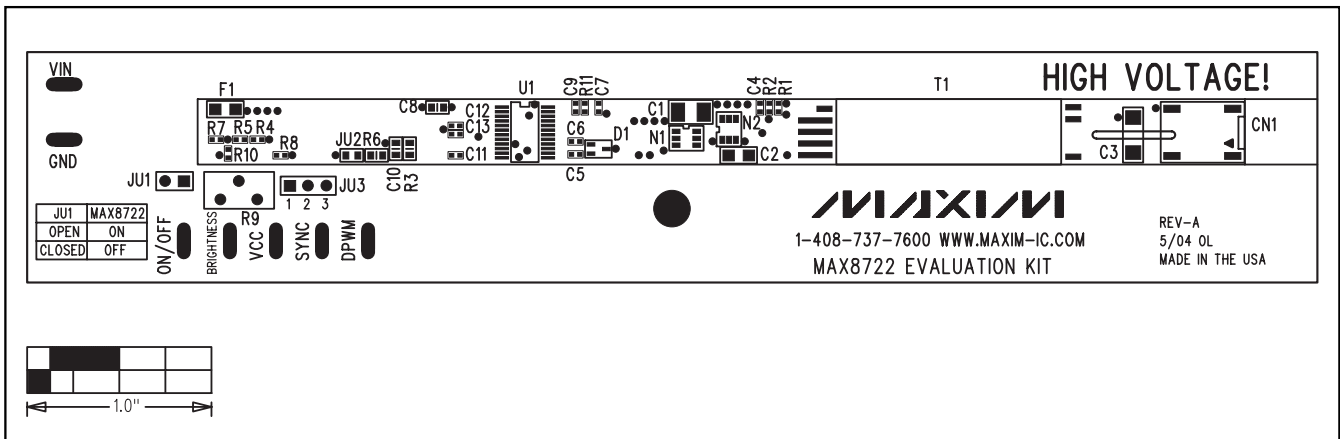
MAX8722 EV Kit Component Placement Guide—Component Side
